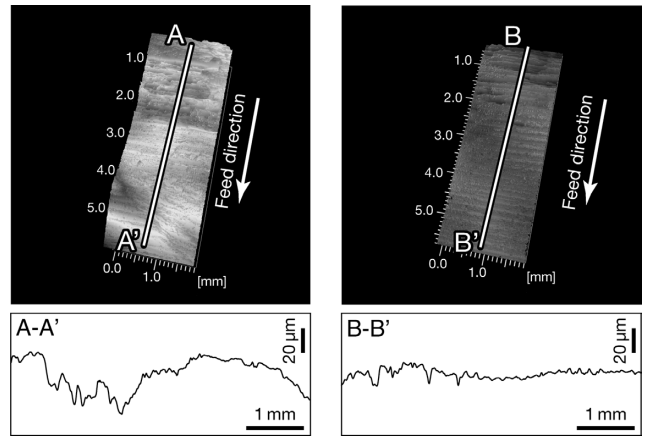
Surface topography of Al and Mg welding material machined using (a) noncoated, and (b) DLC coated tools in drilling experiment, measured by a coherence scanning interferometer; The upper and lower sides of the material are Al and Mg alloys, respectively.
